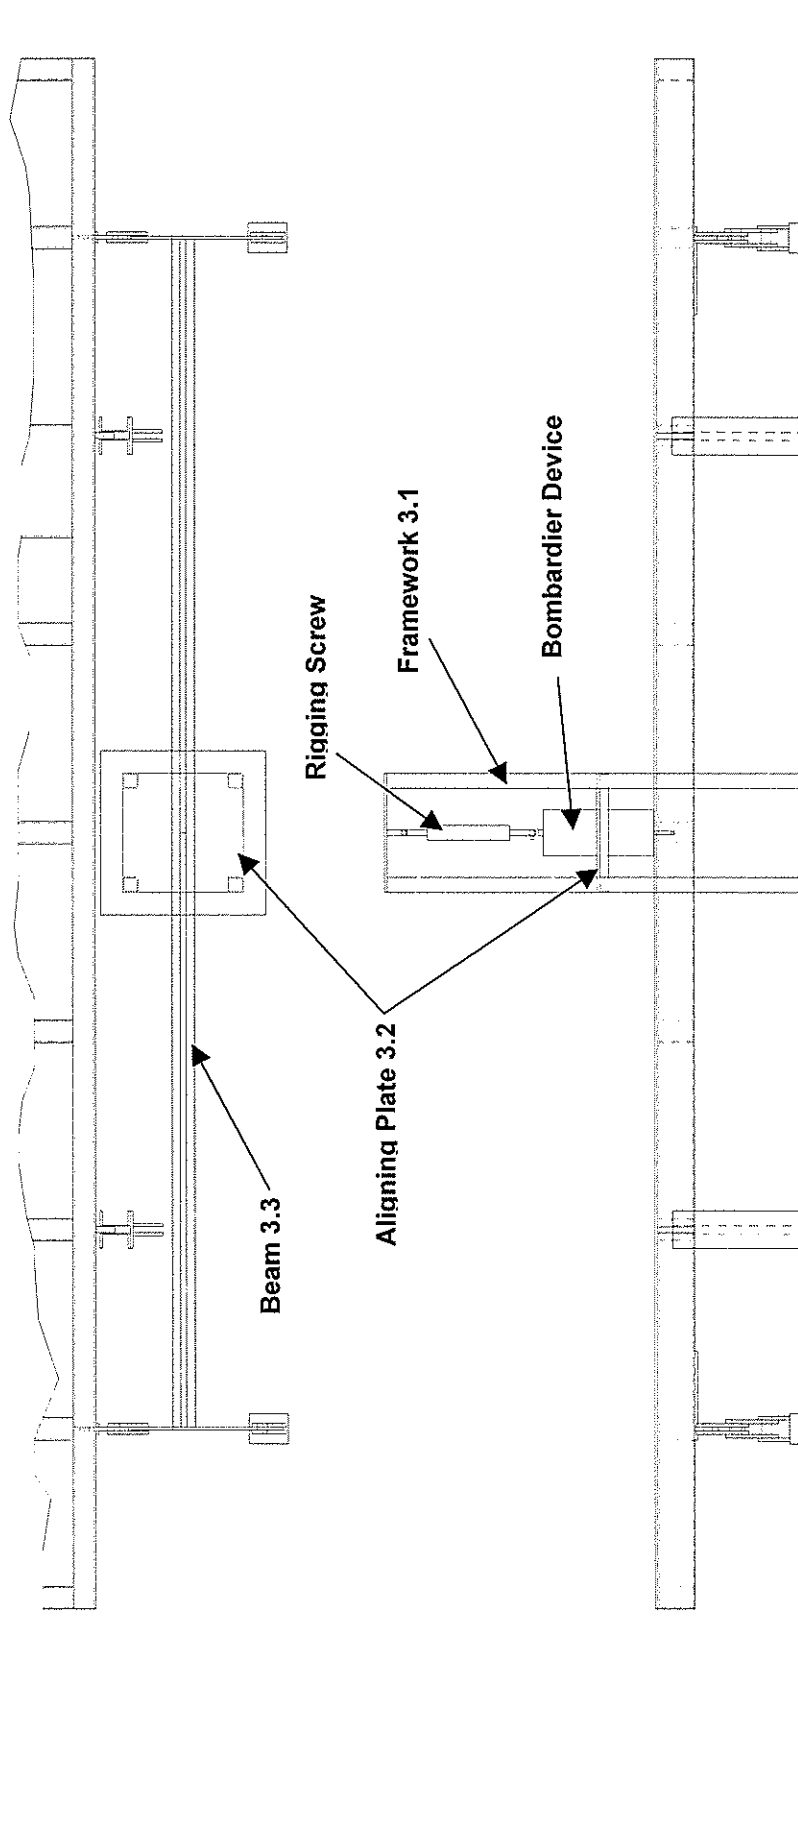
Release System 3.0, general arrangement plan and elevation view.
